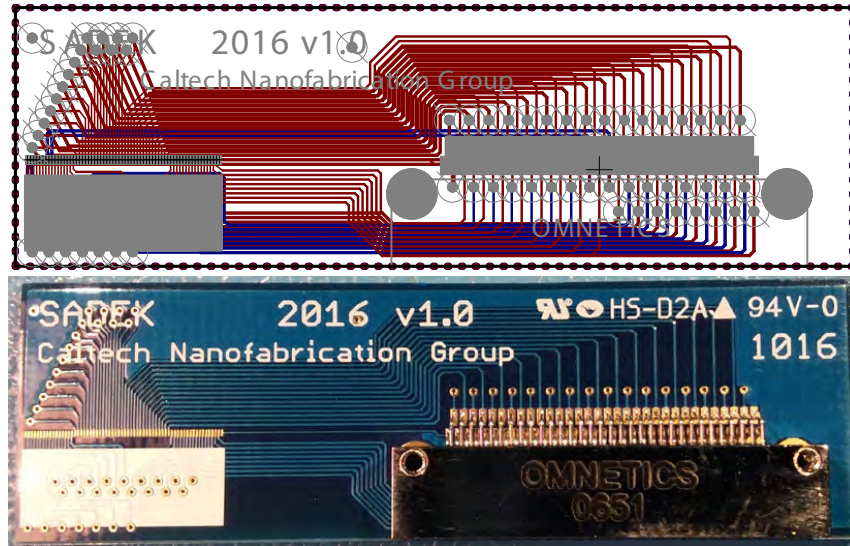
64-Channel neural probe interface PCB. Depicted is the PCB CAD design, and actual PCB with assembled Omnetics connector.
